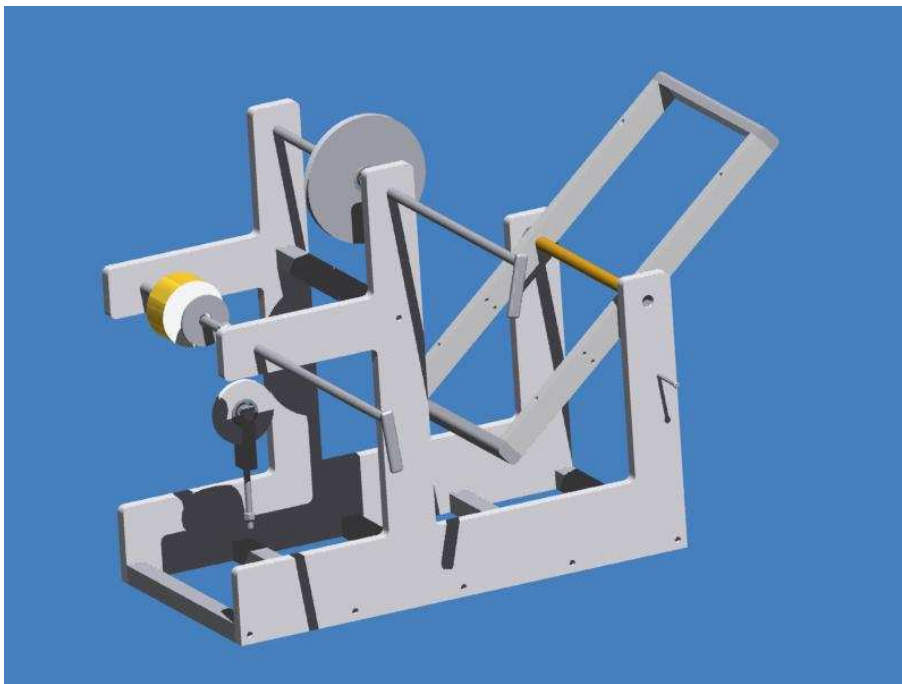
A sketch of the wire winding machine build for the MSPET device.
